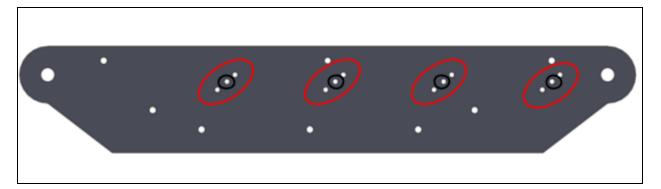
Image of tread plates highlighting the test mounting holes
